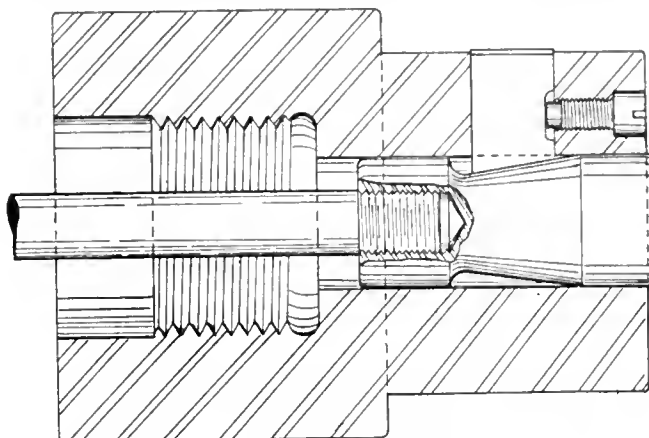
THREE-DOG EXPANDING DRIVER ADAPTED FOR USE ON SPINDLE NOSE OF FINISHING LATHES.
